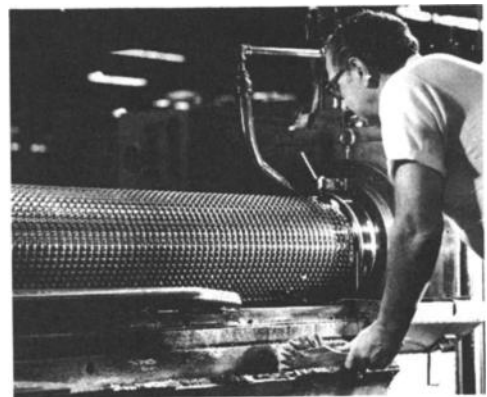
Large broaching tool made from P/M high-speed tool steel. Source: Ref 21
